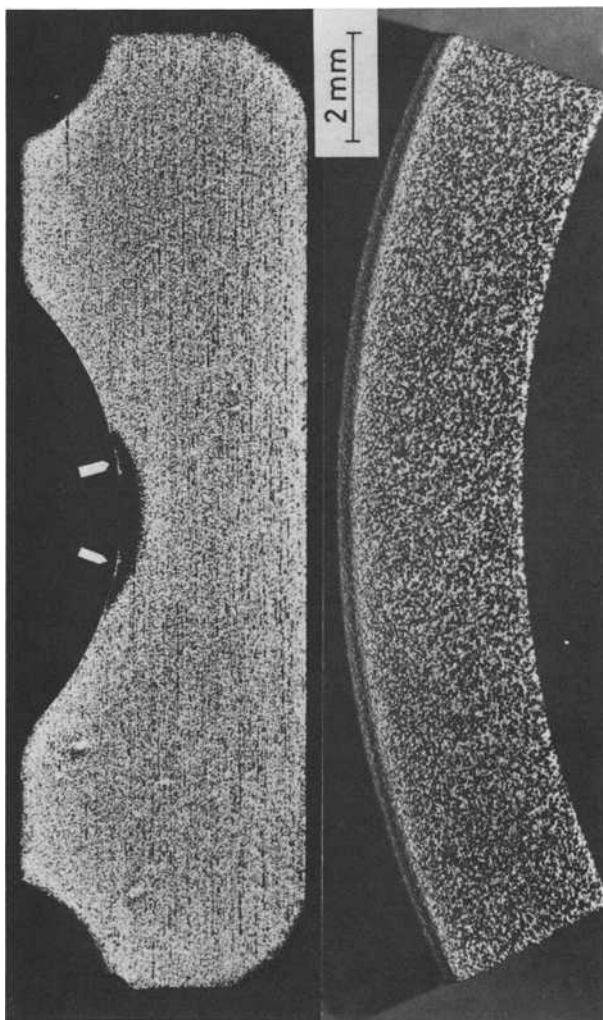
Dark etching area in axial and parallel sections of a deep-groove ball bearing inner ring.
